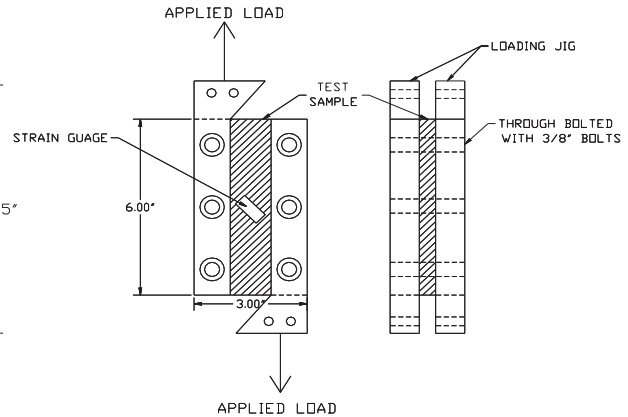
Test Specimen Configuration for ASTM D-4255 Rail Shear Test, Method A
